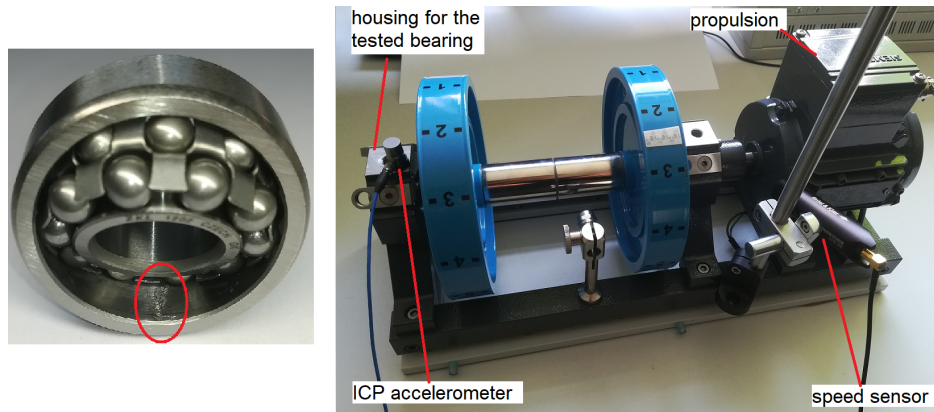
A view on the damaged bearing (left side) and the test stand for bearings (right side).
